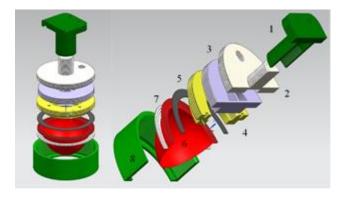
Exploration view of extensible components. 1) adapter (for connecting the gripper system to the robot arms), 2) vacuum channel plate, 3) filter, 4) balloon holder (90 mm diameter), 5) upper sealing ring, 6) membrane, 7) lower sealing ring, 8) housing shell.
